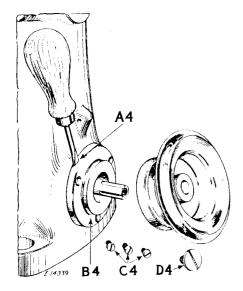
Removing Arm Rotary Shaft Flanged Bushing
